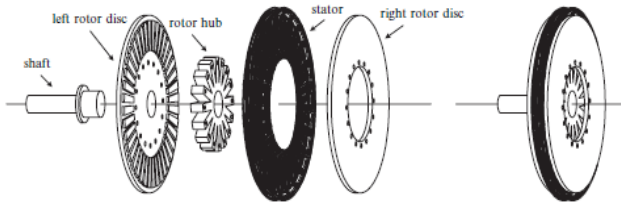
Permanent Magnet machine with shaft integral fan [12]
